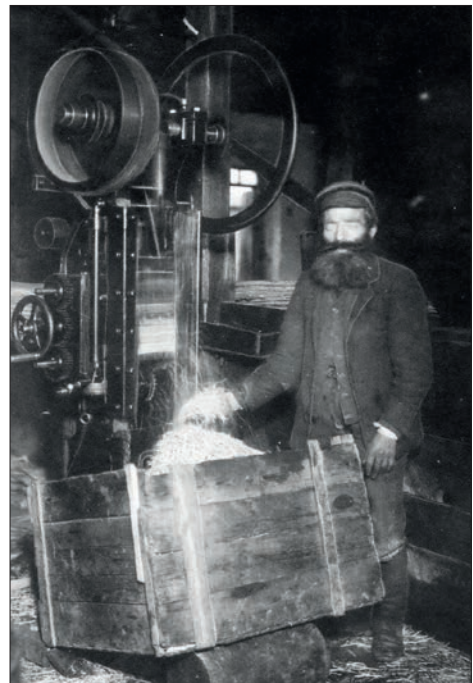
A strip-cutting machine at the Rivne Match Factory. Photo by Solomon Yudovin
